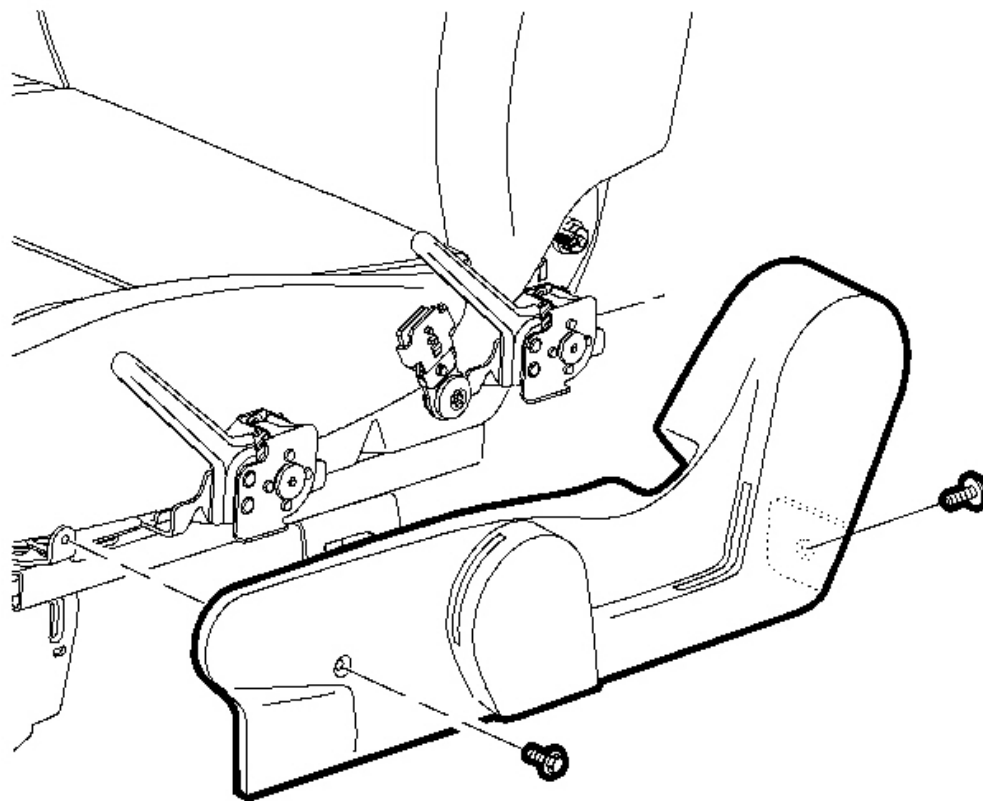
View Of Seat Cushion Outer Trim Panel - Front Seat (4-Way)
